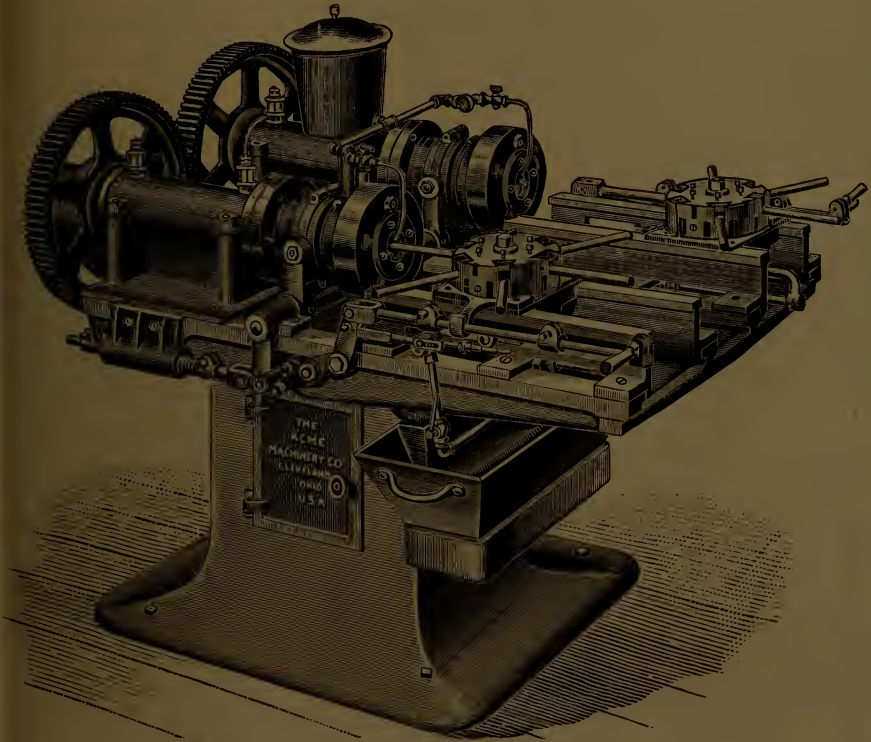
ACME BOLT CUTTER WITH PNEUMATIC TURRET.
